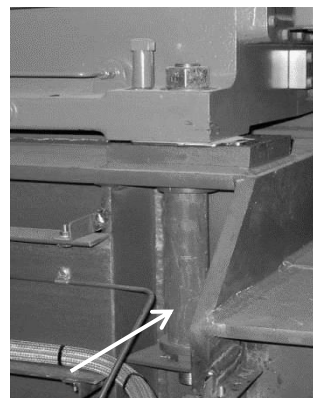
Recip Compressor Crankcase Hold-Down Bolts Using Pipe to Provide Adequate Free-Stretch Length.
